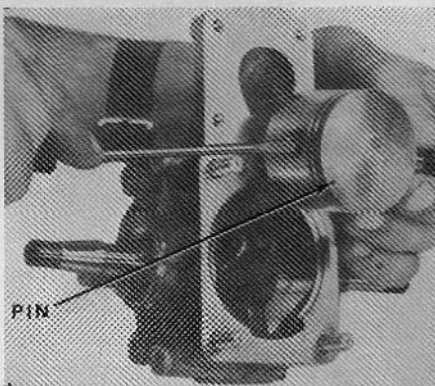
Ring locating pin must be away from exhaust port side of cylinder as shown, when installing the piston to the connecting rod.
